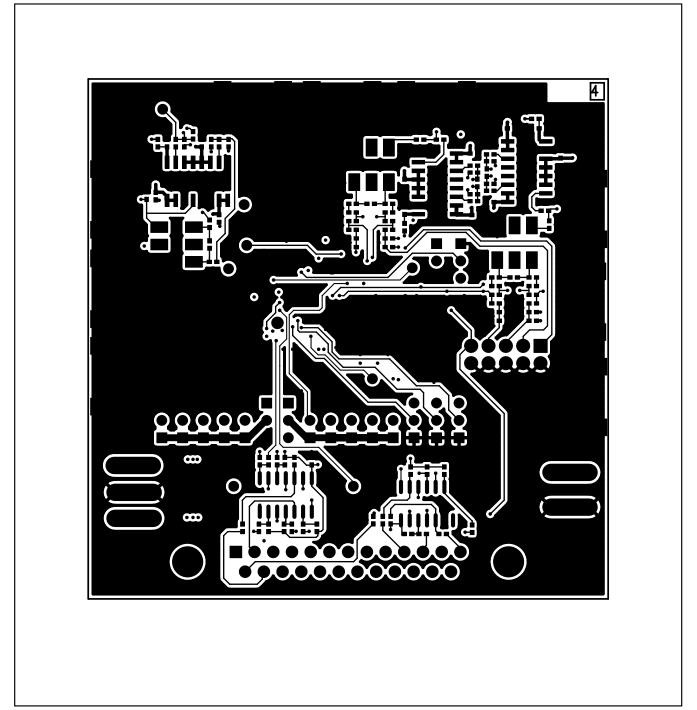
MAX2769 EV Kit PCB Layout—Bottom Layer Metal
